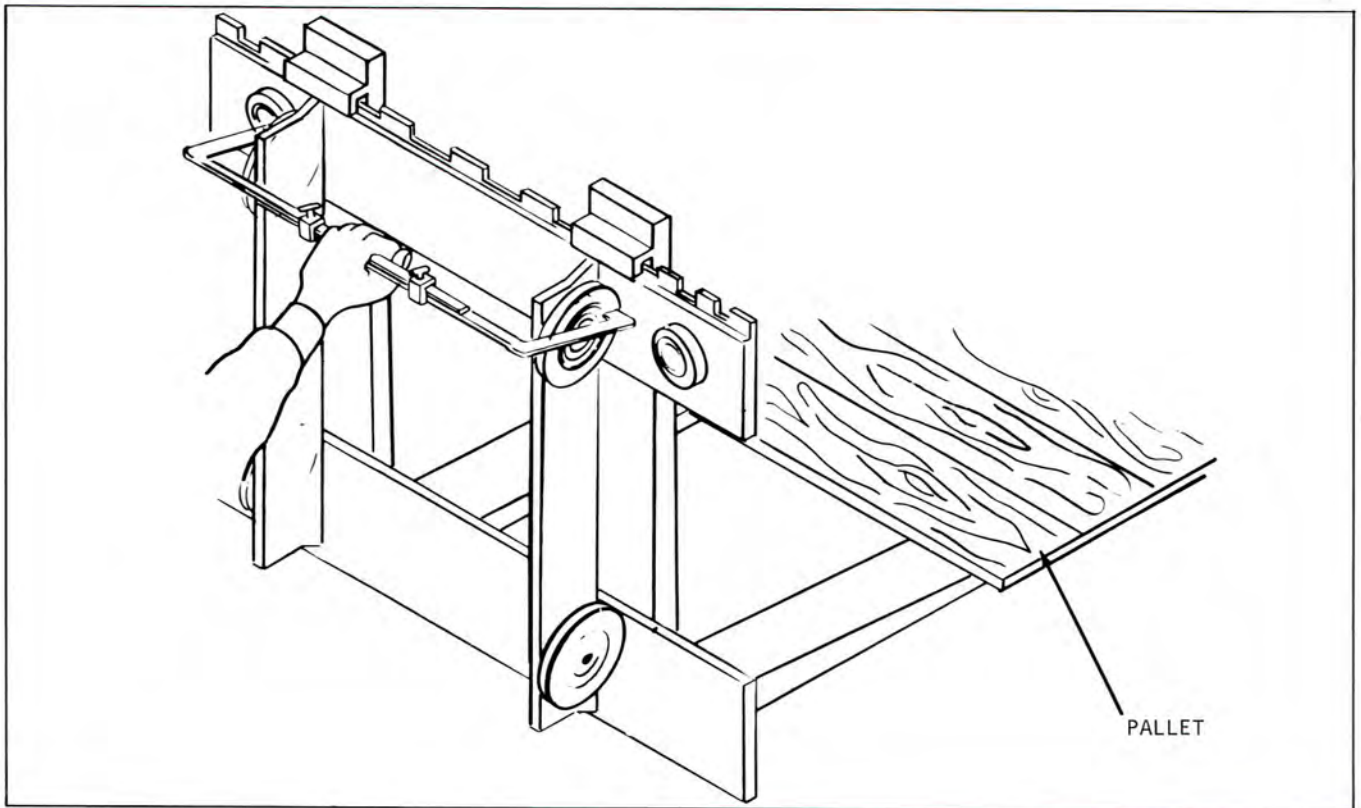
Spanning Upper Rollers (Four Roller Carriage)
